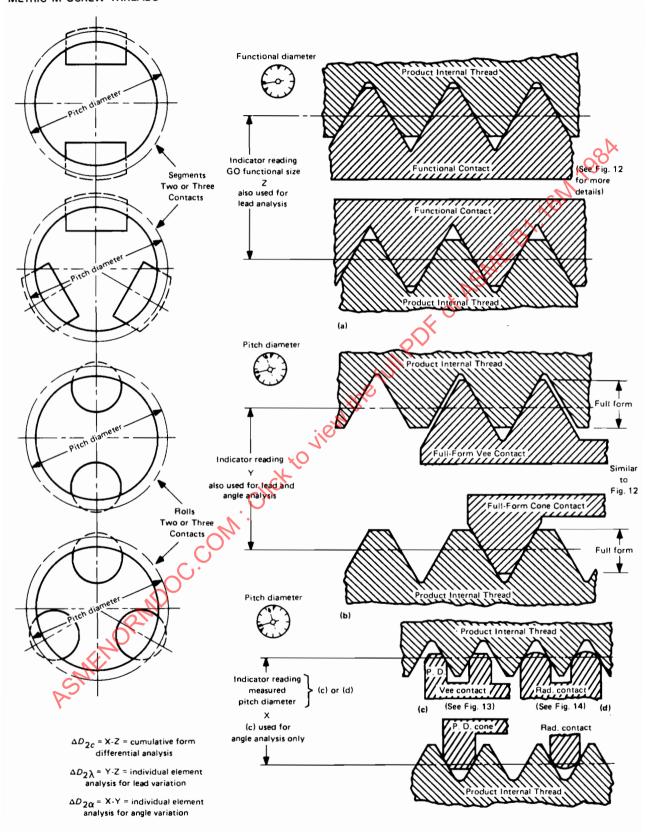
INDICATING THREAD GAGES - DIFFERENTIAL GAGING
